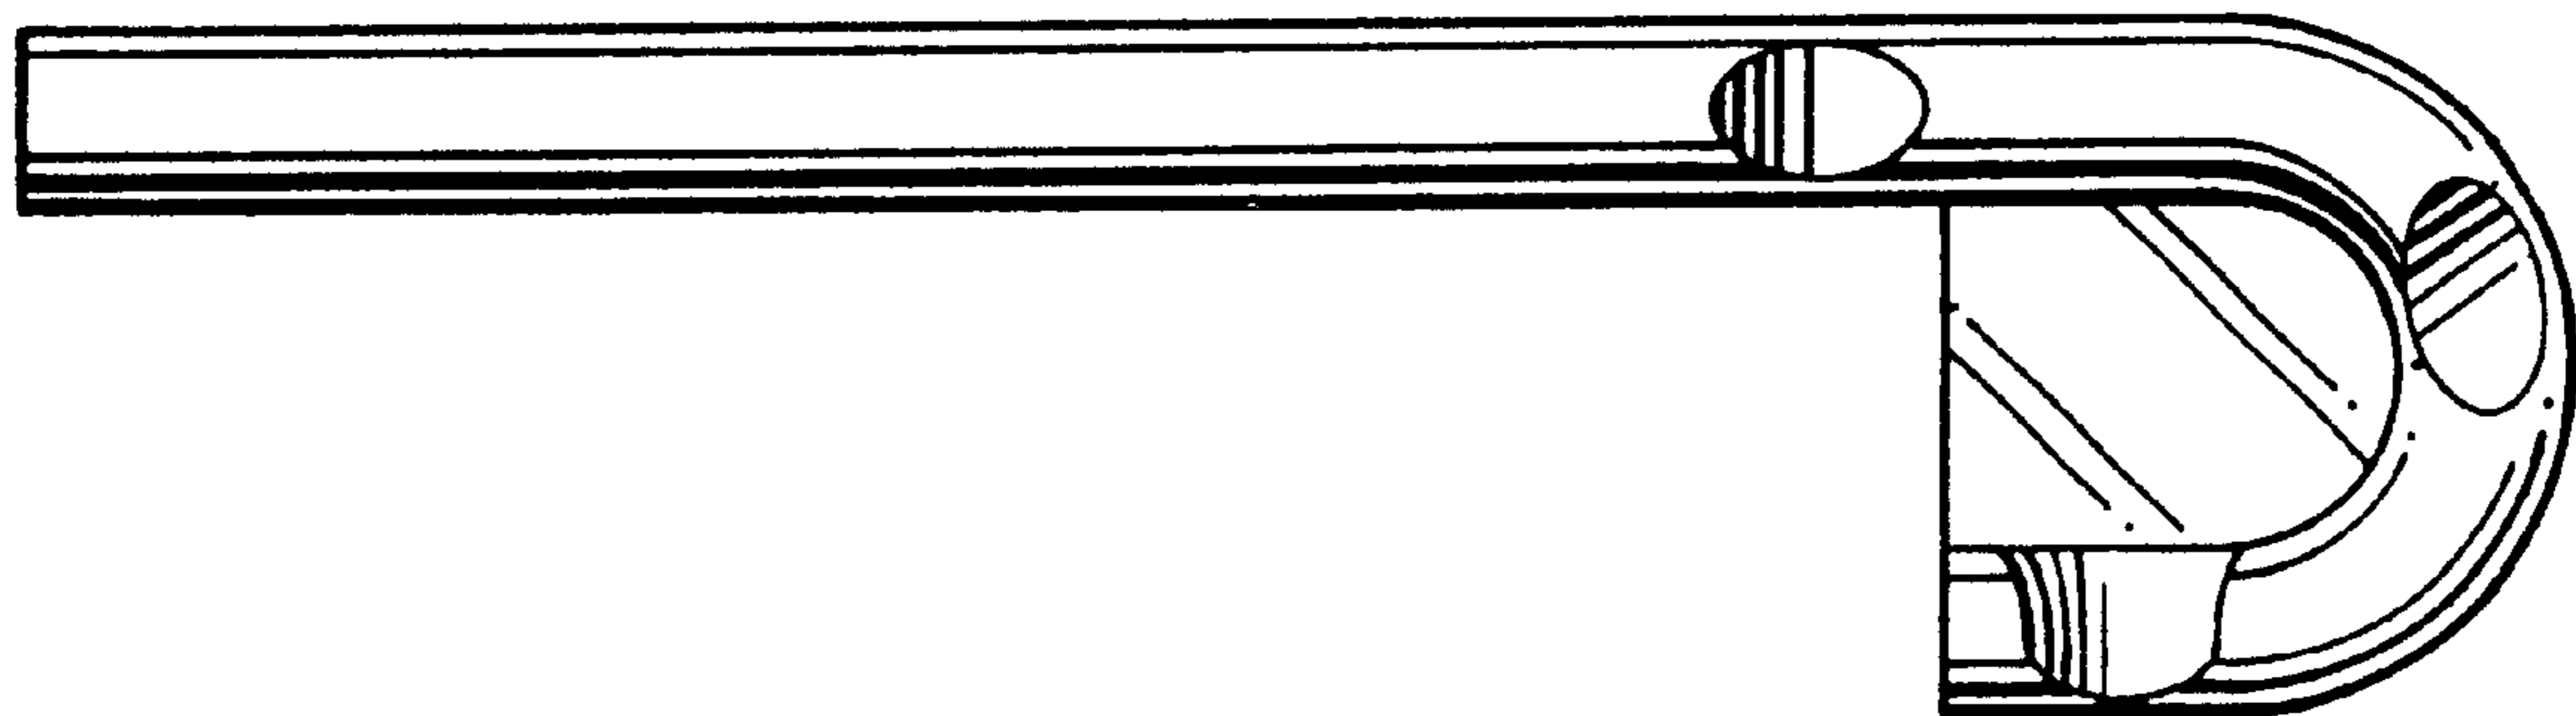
is a top plan view of the candy cane shaped eye screw tool of FIG. 8;
